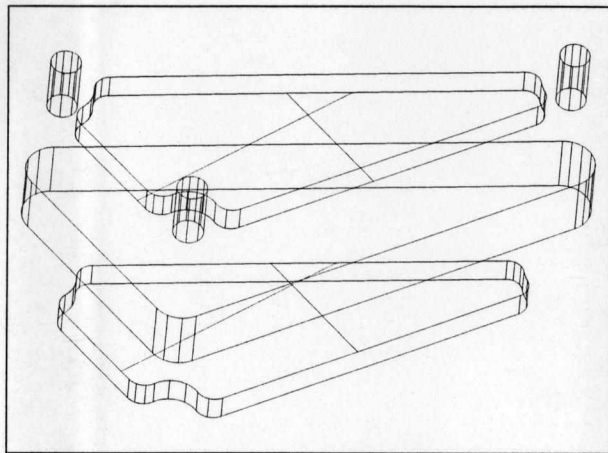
Exploded view of the features making up the reverse engineered shock plate.
